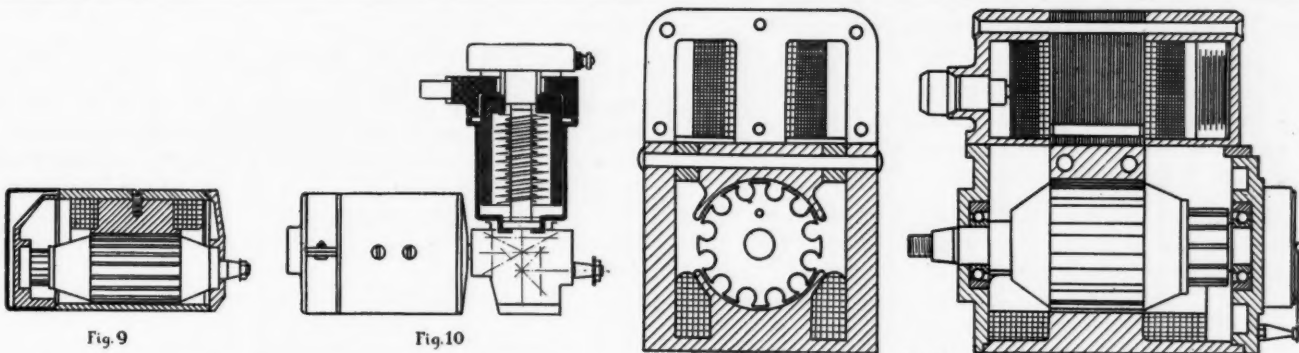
Lucas Co. dynamo with eccentric armature for belt drive. Fig. 10—Sparxlight Co. dynamo with rotary coil and contact breaker mounting
